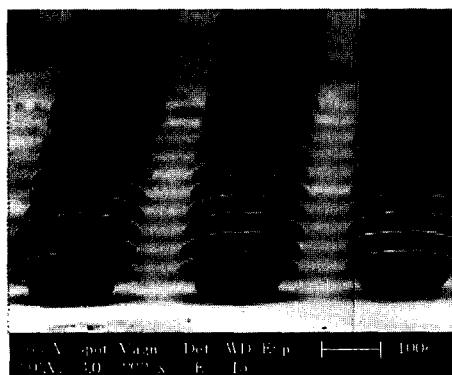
Sn-Cu solder bumps formed on a Si-wafer.
